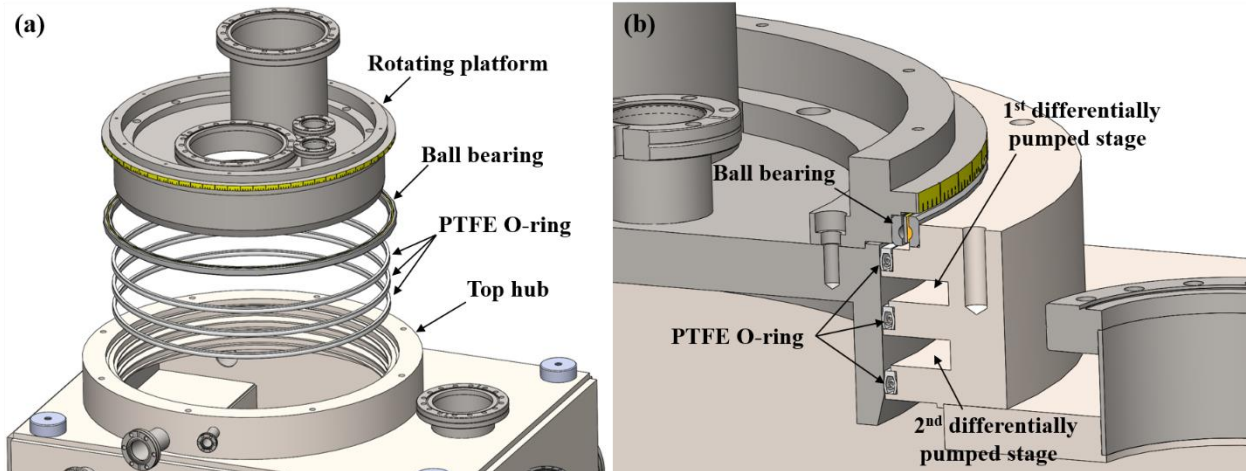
(a) Exploded view of the top hub and the rotating platform. Between them, three spring-loaded O-rings and two differentially pumped stages protect the UHV condition from leaking during the rotation of the platform. (b) Section view of the rotary seal. See text for the working principle.
